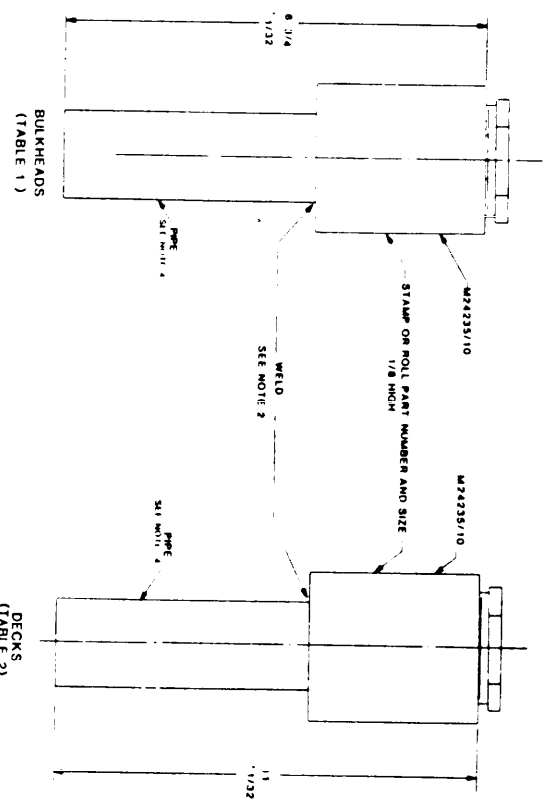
B62. Multi-cable penetrators Installation notes (type TW).
